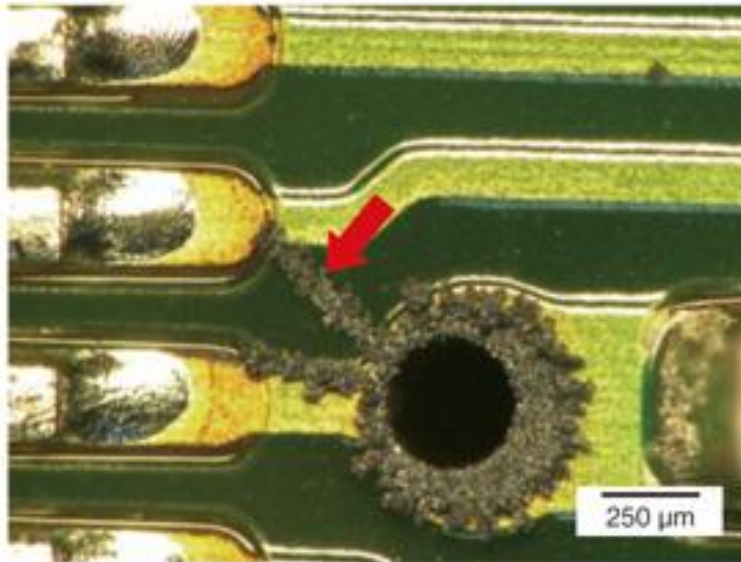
Short in adjacent solder hole and bus line as a result of surface deposition [20]
